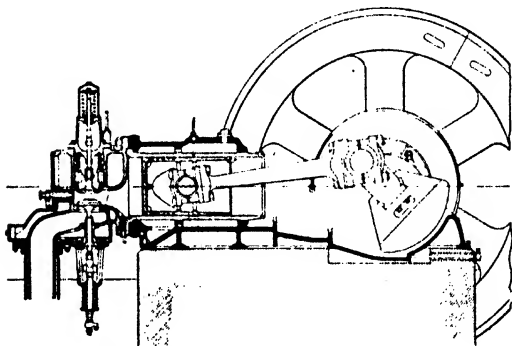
Otto Gas Engine, Longitudinal Section of Horizontal Type
